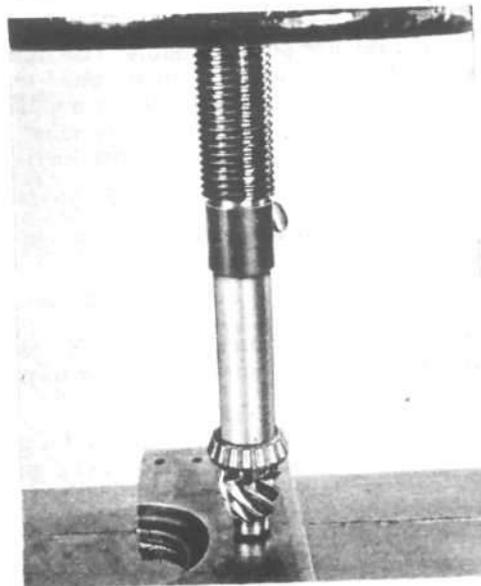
PINION REAR BEARING INSTALLING SLEEVE
